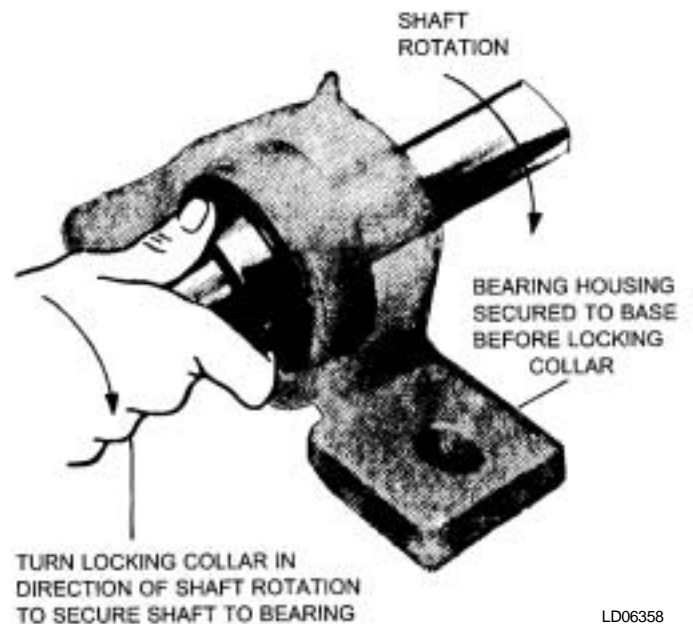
BEARING INSTALLATION – ECCENTRIC LOCKING COLLAR
